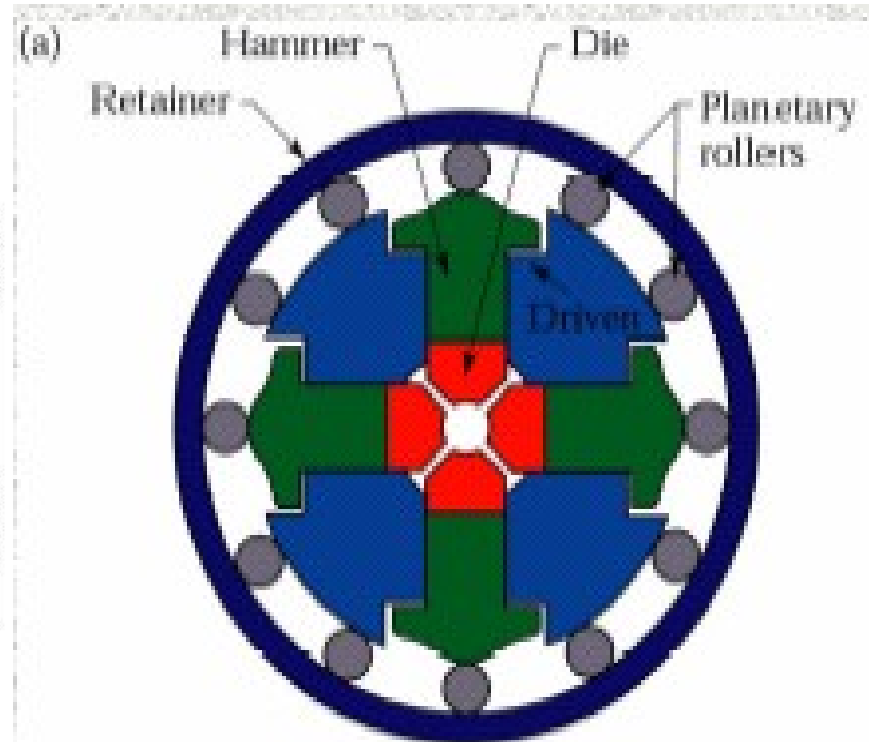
Basic components and motions of a rotary swaging machine. Note: The cover plate has been removed to reveal the interior workings. (Courtesy of Torrington Company.)
